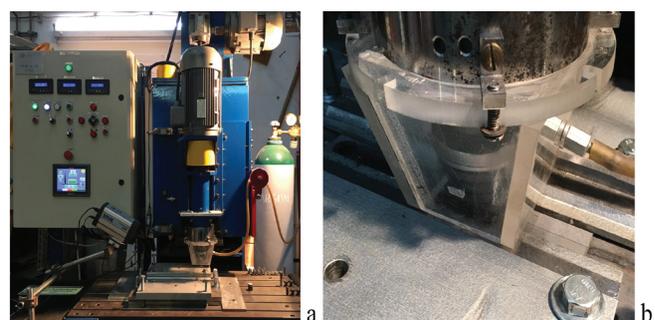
FSW machine with variant 3 (enclosure type) of applying inert shielding gas to welding (a) and detail-enclosure (b)
